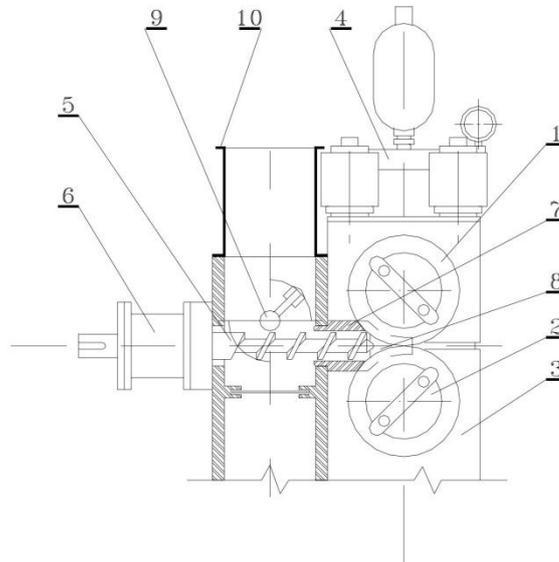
Roll Press Assembly - Cross Section of Pressing System.
